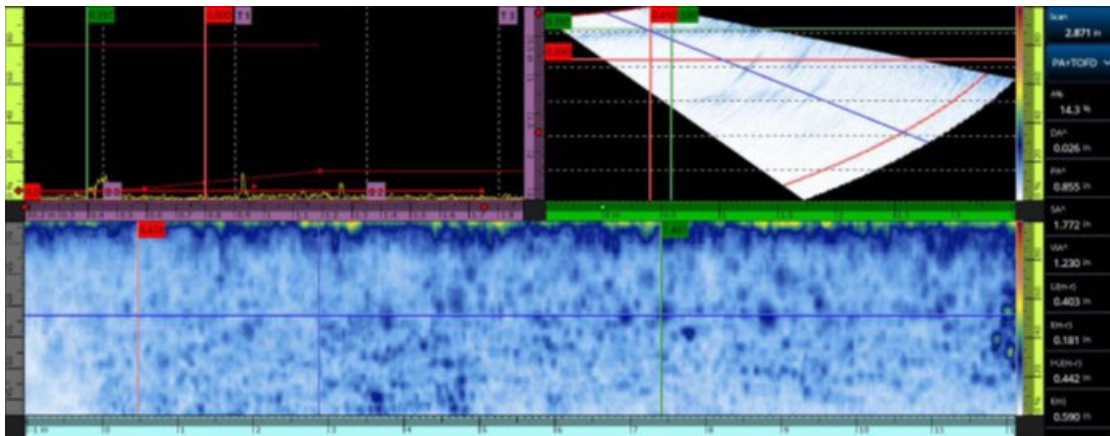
PAUT indication of defects at Locations A and B in fillet weld test panel TTCI-P2 from OD-encoded scan
